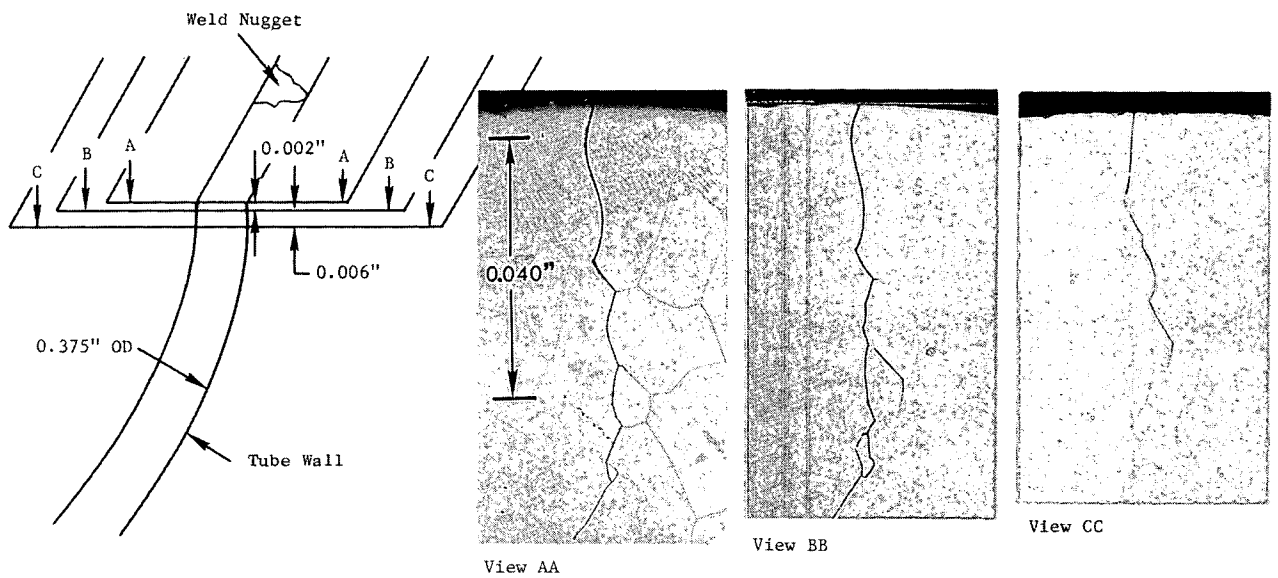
Intergranular crack in weld nugget of 0.375-inch-diameter T-111 boiler tube removed from T-111 Rankine system corrosion test loop.
